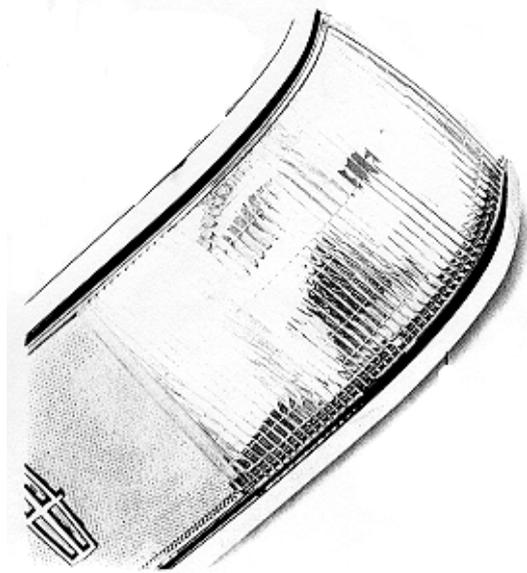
An automobile headlight; parts were joined using hot tool welding.
